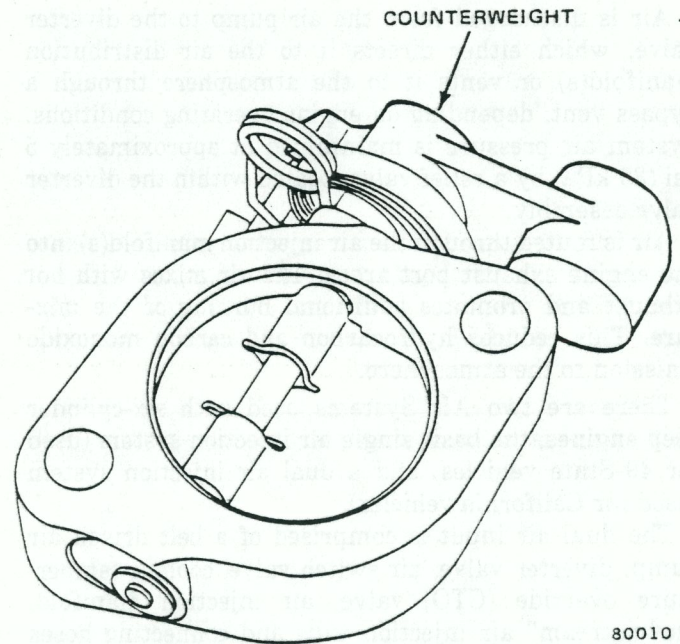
K-7A Manifold Assembly—Six-Cylinder Engine
